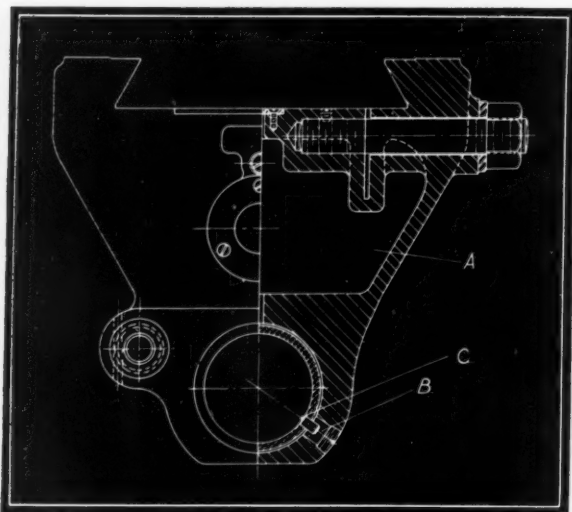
Milling machine arbor embodies a flush oiler which supplies lubrication automatically in operation
